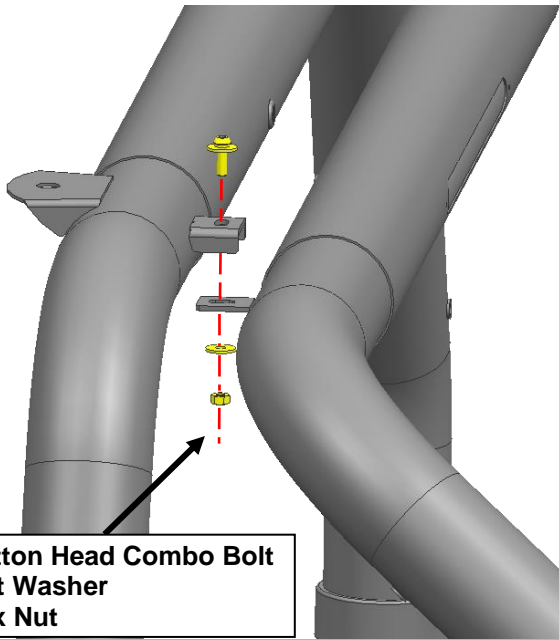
Attach Mounting Brackets to bottom of legs. Driver/left side illustrated
